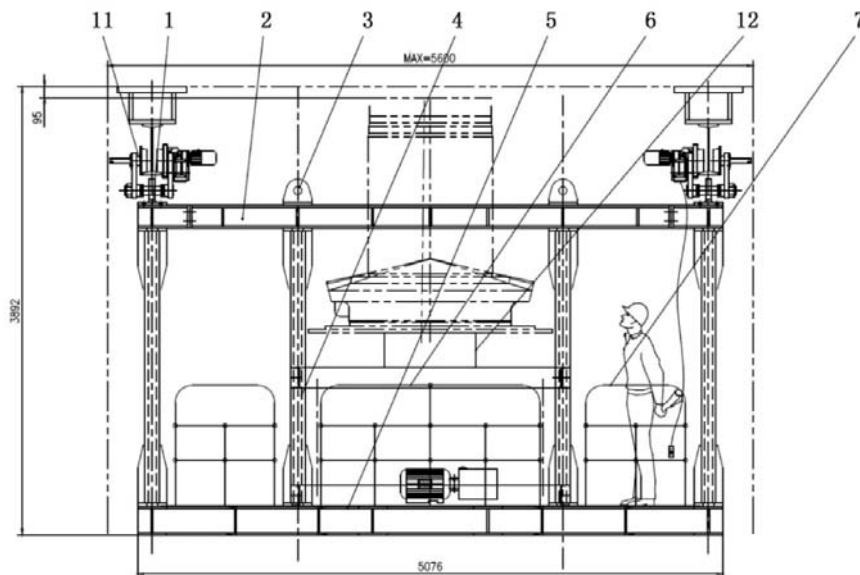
Layout of the drive shaft assembly for gyratory crusher (PXZ-1500II)
